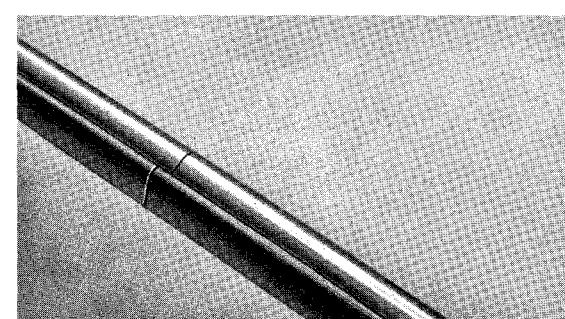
Same process as illustration 3, but using auxiliary tools – a hot strip of metal held in a pair of flat pliers instead of welding equipment. As soon as a temperature of 250°C to 300°C has been reached, the hot metal strip must be removed from the joint and the surface pressed firmly together, forming a welding seam.
